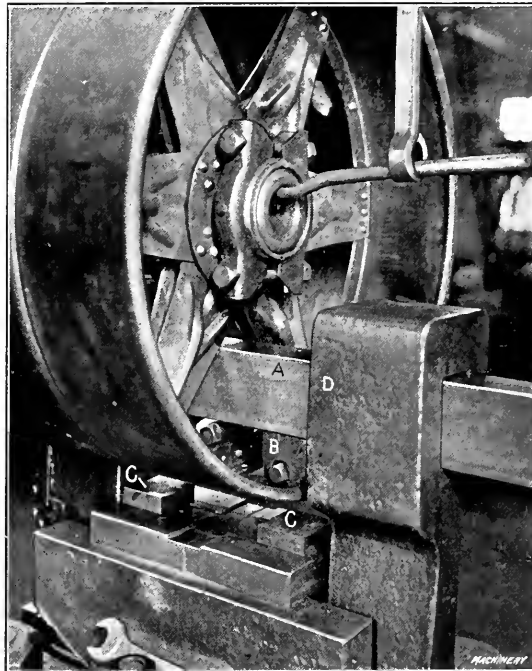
Special Hydraulic Riveter for setting Rivets in Bolt Clamps at Rim Joint
